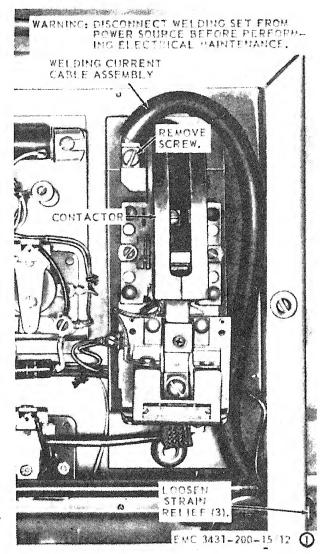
Cable assemblies, grip, strain reliefs, power switch, and terminal strip, removal and installation.
